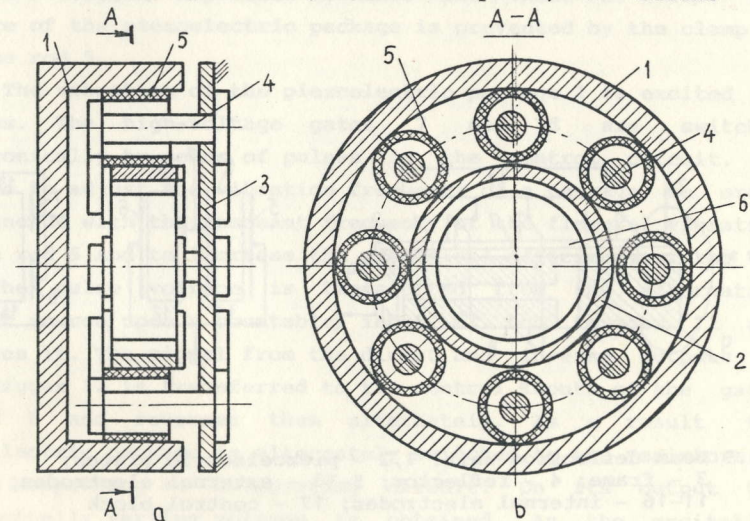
Vibrodrive: 1 - rotor; 2 - elastic element; 3 - immobile support; 4 - bearing axes; 5 - piezoceramic ring vibroconverters; 6 - bearing element
